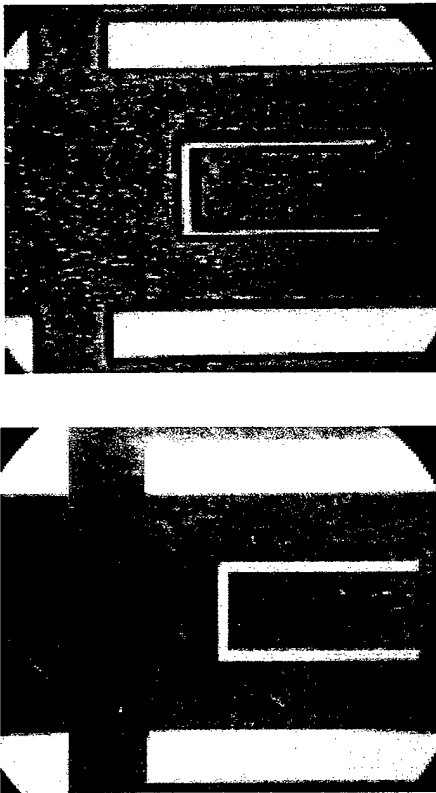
Laser machined laminates before (top) and after (bottom) clean-up of the part with surface polishing.
